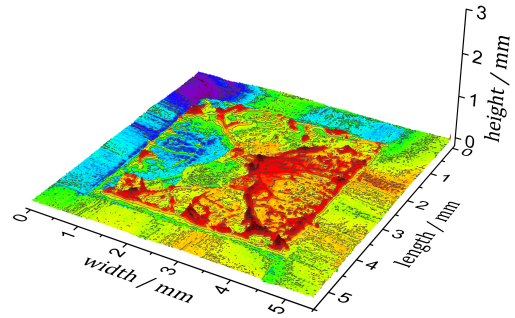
3D representation of an FNCT fracture surface.
